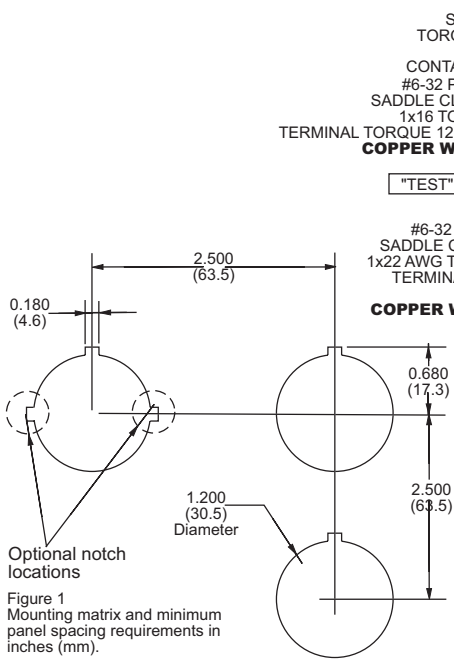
Mounting matrix and minimum panel spacing requirements in inches (mm).
